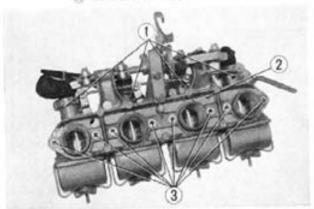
① Carburetor ③ Setting screws ② Carburetor stay plate
